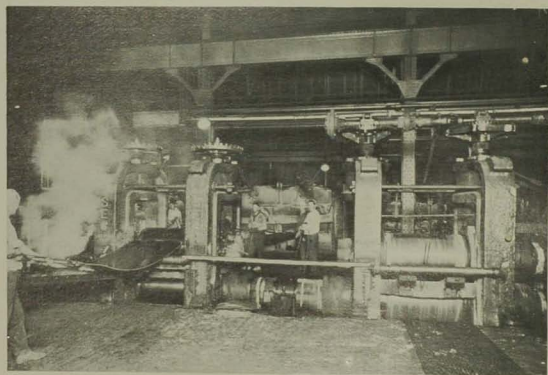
Hot Rolling—Nickel Sheet and Monel Metal.
